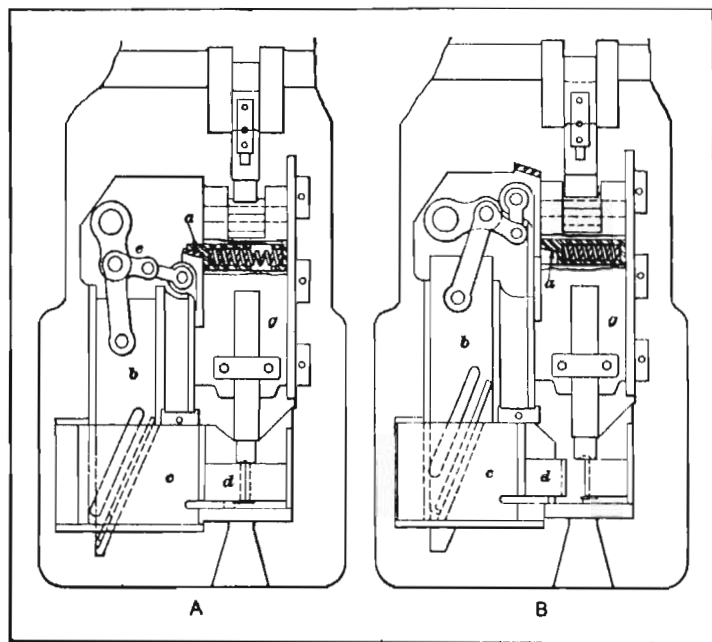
Bevel Spring Plunger Type of Relief Mechanism on Bolt and Rivet Header
